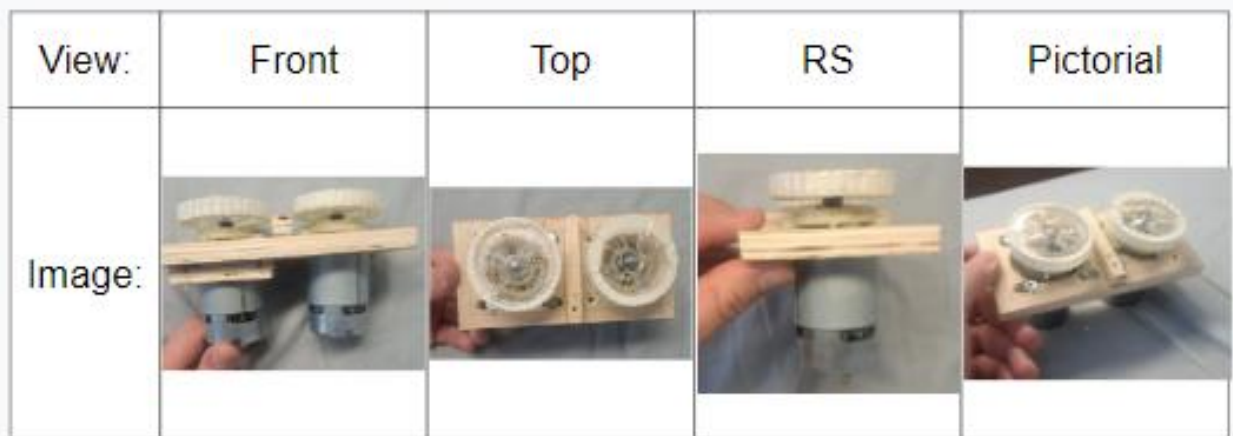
Second prototype base made of plywood, screws and wood glue (had both 12V motors with flywheels installed).
